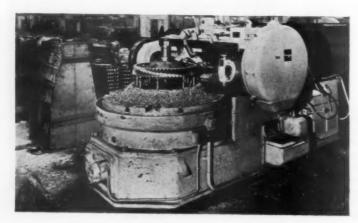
Wormwheel being hobbed on wormwheel generator.
